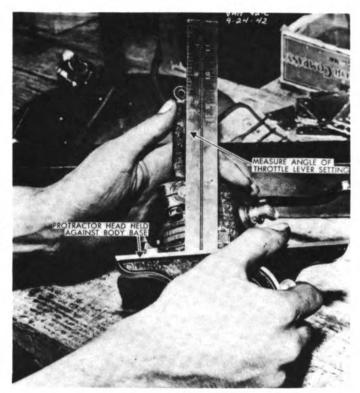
Taking Protractor Reading of Throttle Lever Angle.
